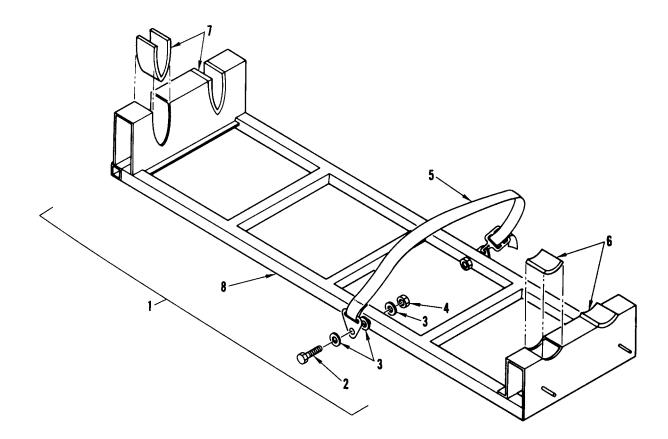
GROUP 80 SPECIAL TOOLS TAIL ROTOR BLADE SUPPORT
